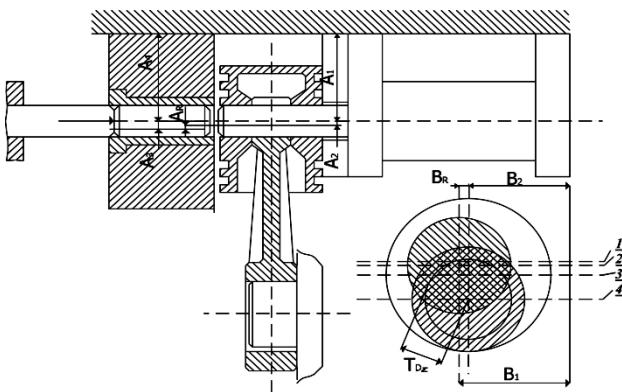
Scheme the guidance when fitting piston with bolt and connecting rod: 1 – axis piston; 2 – axis rod; 3- axis connecting rod; 4- axis bolt.
